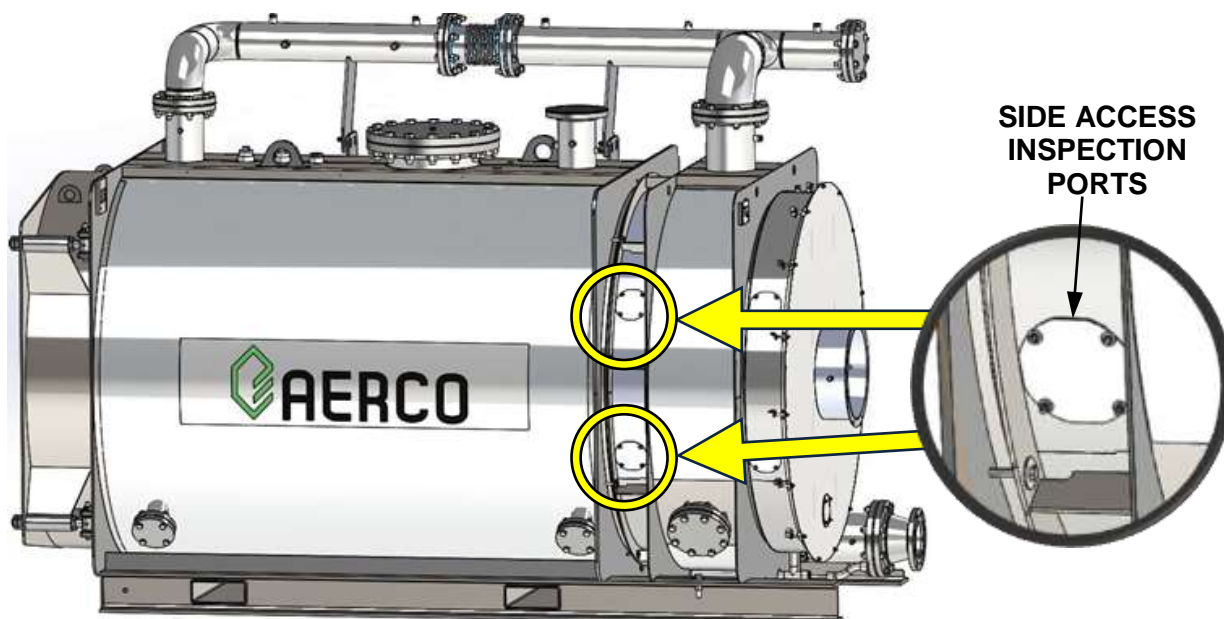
Location of Side Access Inspection Ports (Two Each Side)
